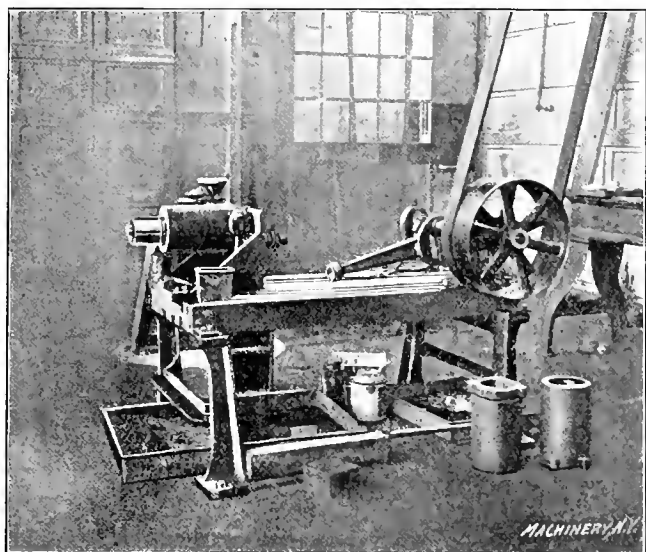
Piston Lapping Machine in Marmon Factory, showing Connecting-rod Disconnected at Ball-and-socket Joint
